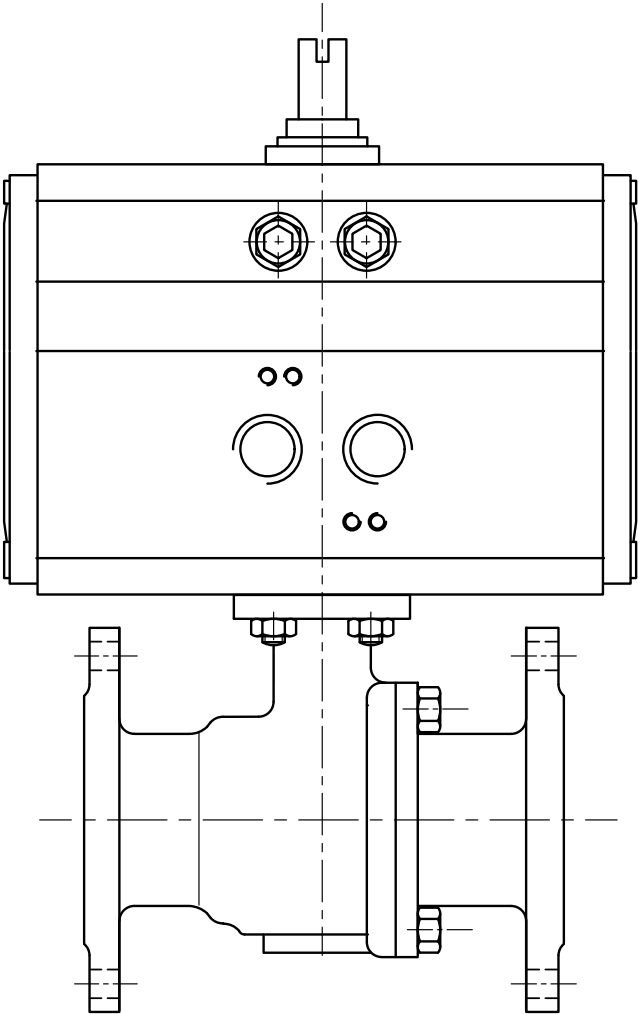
PNEUMATIC ACTUATOR OPERATED VALVE
